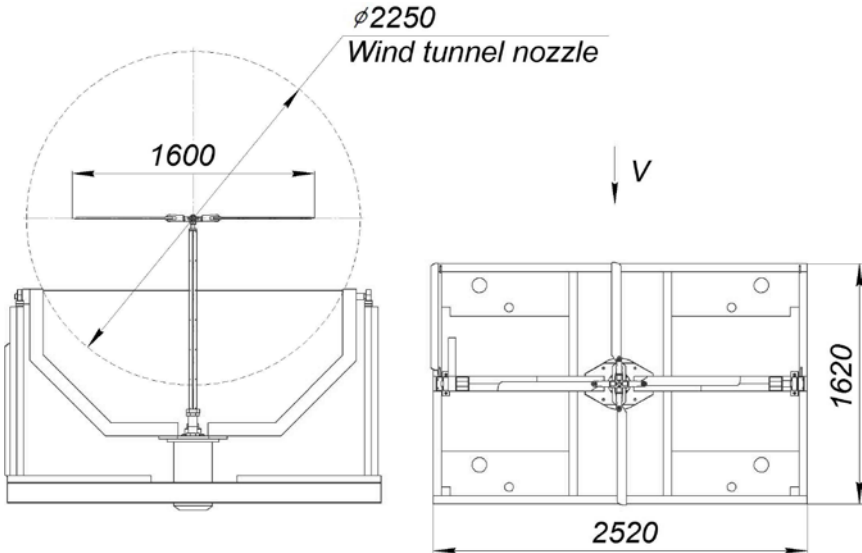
Rotor rig used in the T-1K wind tunnel. Dimensions are millimeters
